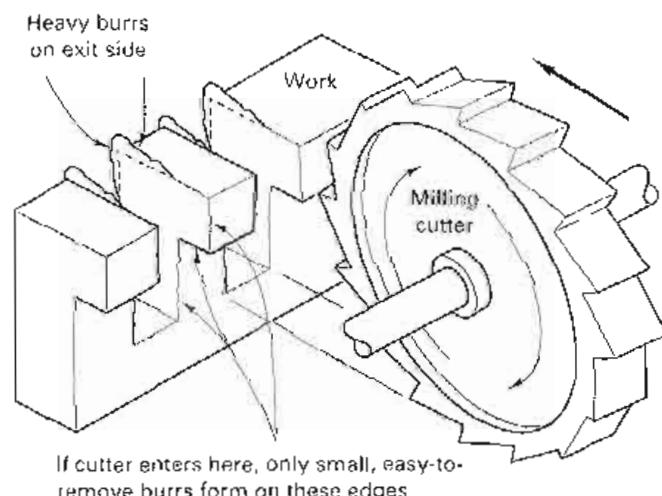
Schematic showing the formation of heavy burrs on the exit side of a milled slot. (From L. X. Gillespie, American Machinist, November 1985.)
